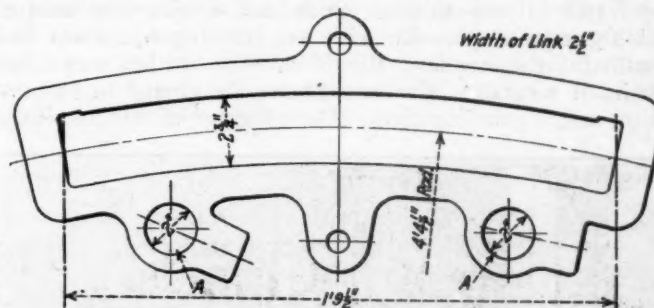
Common Type of Link Ground on Machine Shown in Fig. 3
